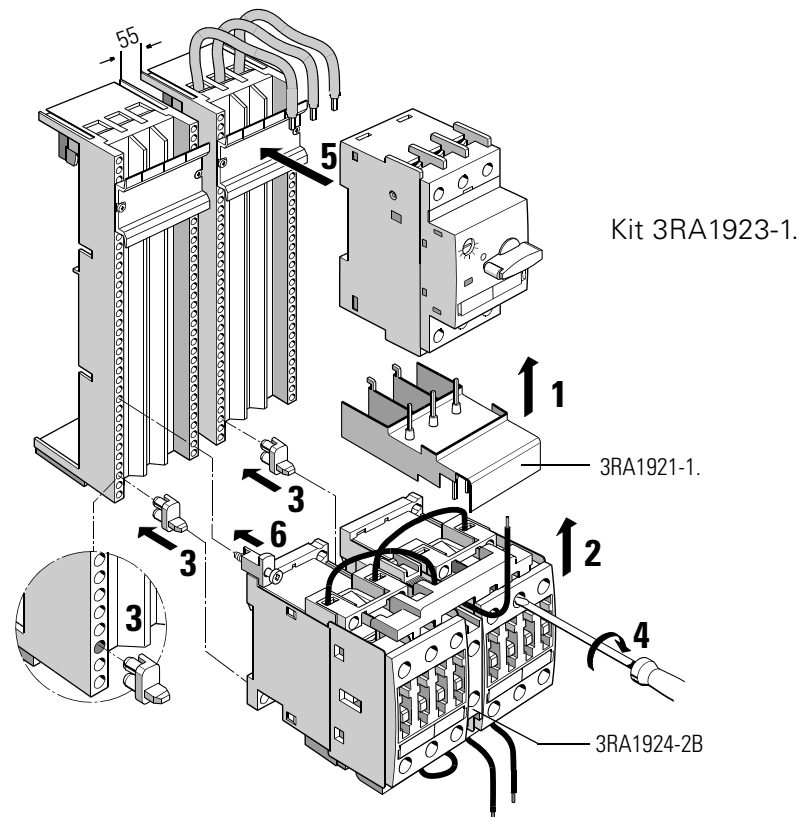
Self-assembly, busbars, reversing operation (frame sizes S00 and S0)
